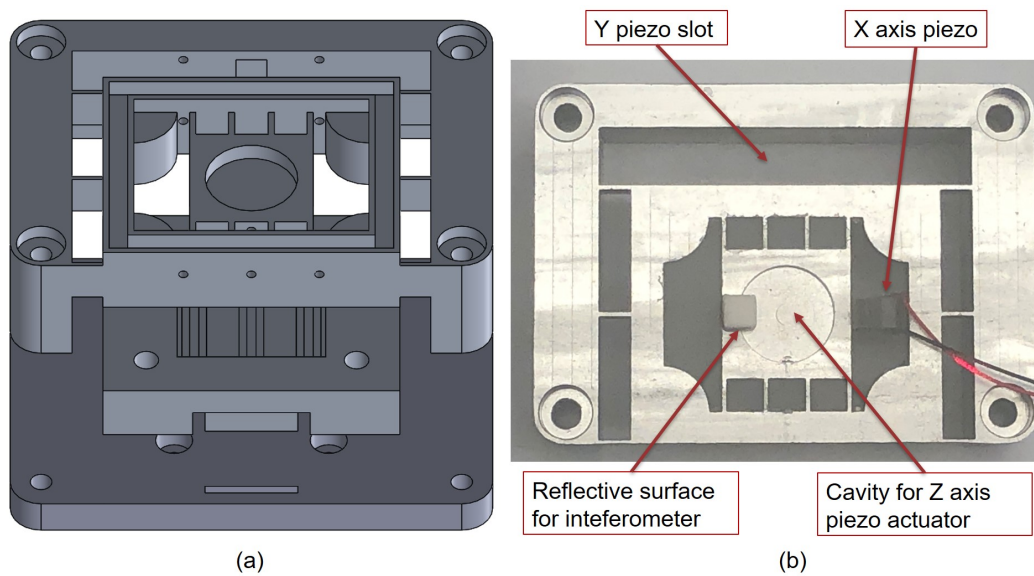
Parallel kinematic flexure scanner design: (a) CAD design of the flexure with mounting structure, (b) top view of the fabricated scanner configured for  $X$  axis dynamics testing
